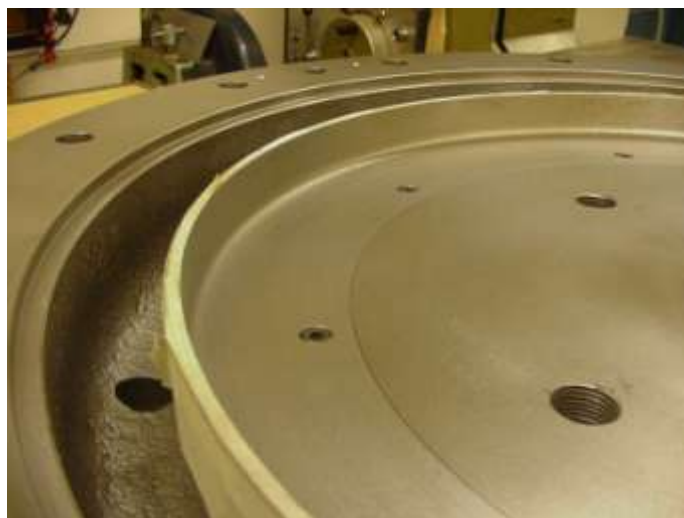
Picture showing the 'L' shaped seal creating a cylindrical shrouding on balance side of casing.
